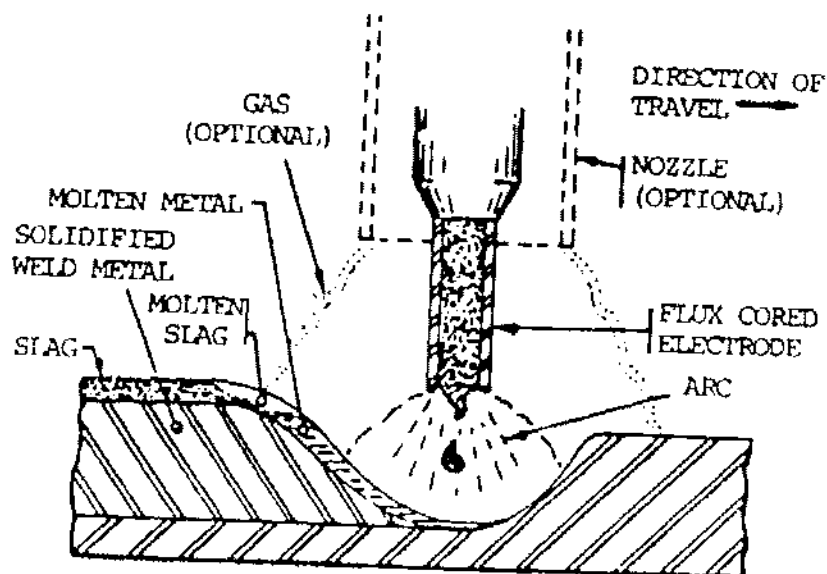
FLUX CORED ARC WELDING
